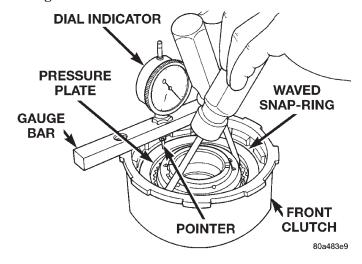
Measuring Front Clutch Pack Clearance REAR CLUTCH
